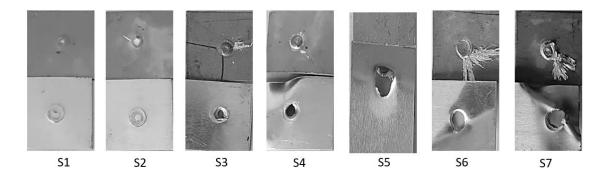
Fracture appearance after the tensile-shear test and expulsion formation at the faying surface between Ti-Gr2 alloy- A5754 alloy joints with different welding currents.
